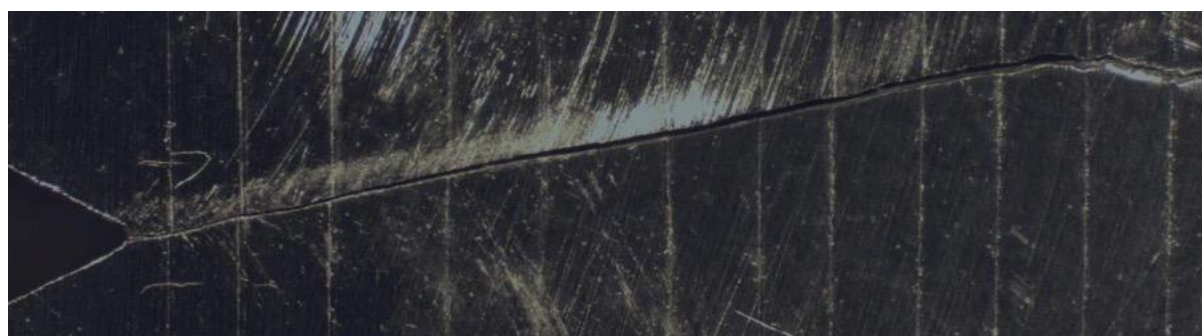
Fatigue crack for 5.75 m/s specimen
